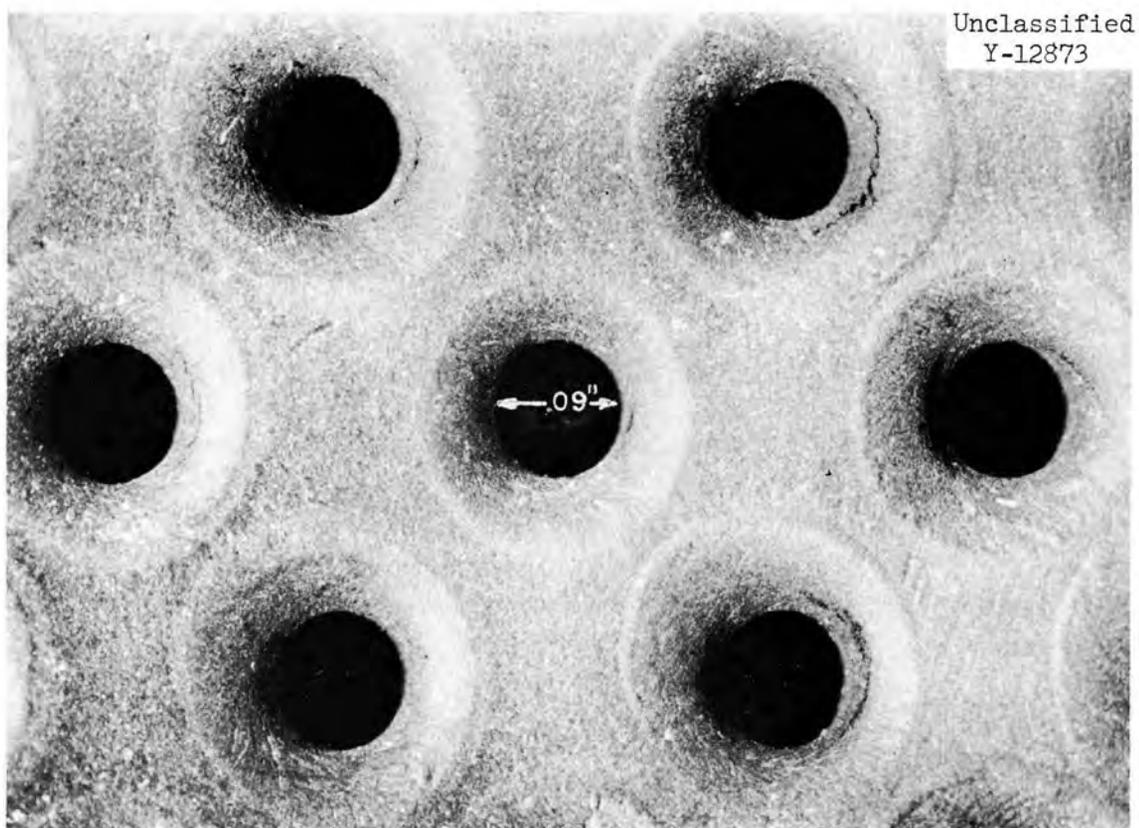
Peripheral Cracking of the Tube-to-Tube Sheet Welds Observed After Performance Testing.
